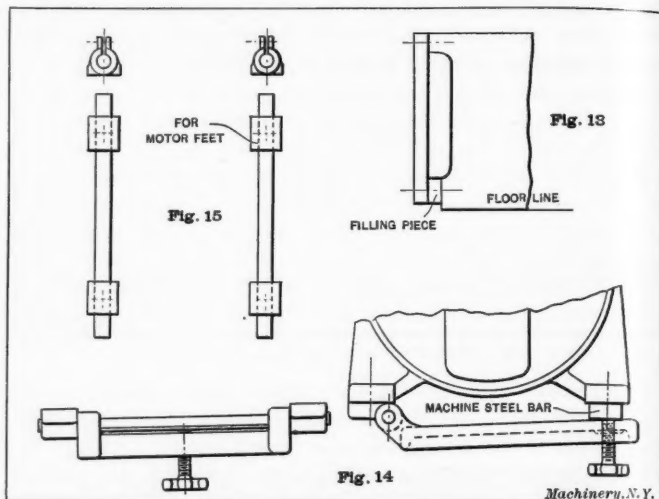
Method of Bolting Motor to a Machine Tool. Fig. 14. Swinging Bracket for Use where there is Room for Handwheel. Fig. 15. Pipe Motor Support
